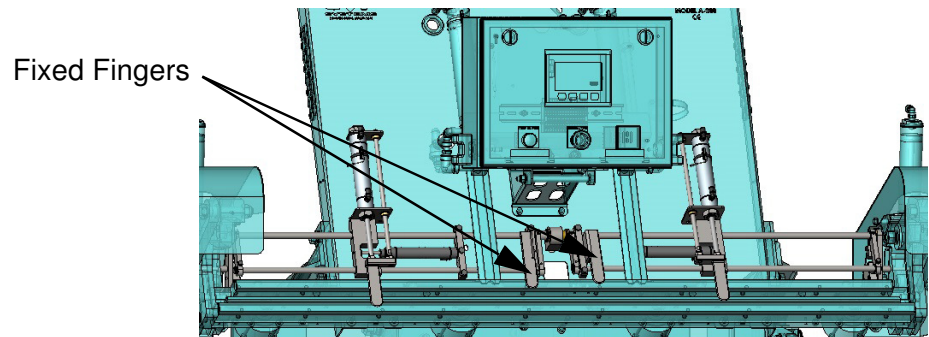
Double Bag Stretchers (Front Manifold removed for clarity)
